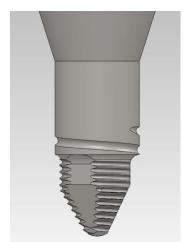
The picture shows the threads on the Probe. The thread highest on the Probe is the coarse thread. The picture also shows one of the milled down surfaces.
